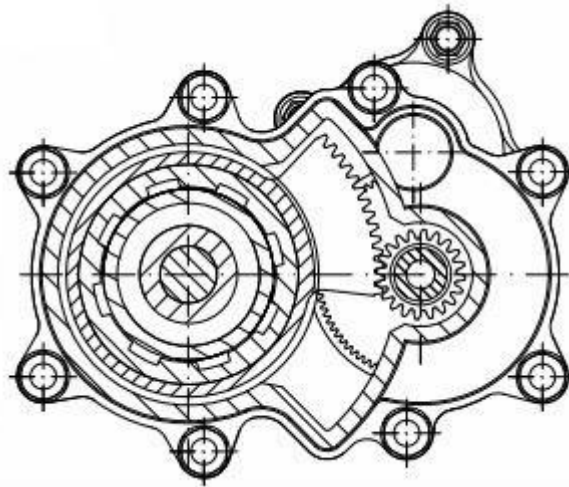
Geared connection between disconnect device and secondary BLDC motor [33]
